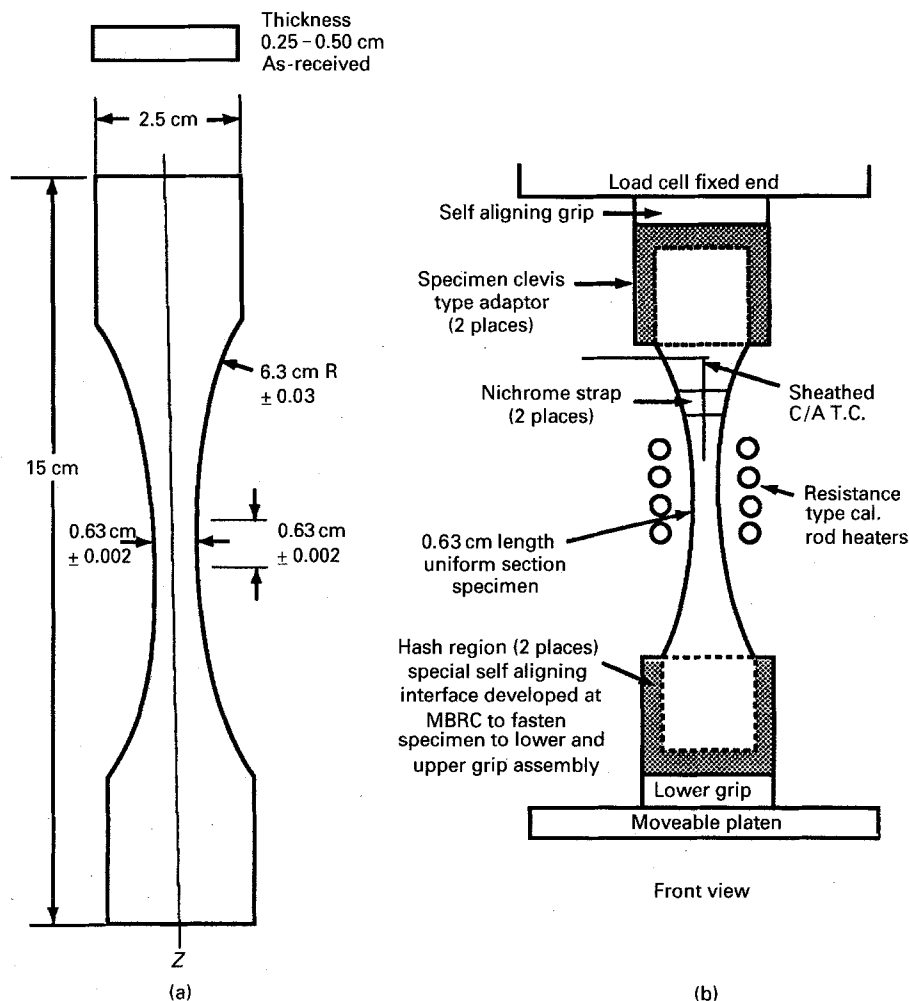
Sketch describing tensile and high-cycle fatigue test set-up; (a) specimen configuration, and (b) test fixture.
